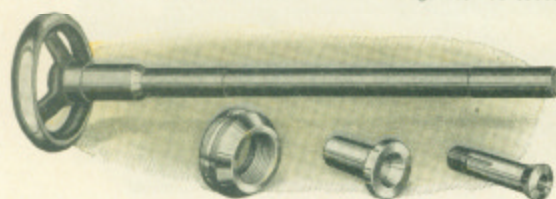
Hand Wheel Draw-in Collet Chuck Attachment
